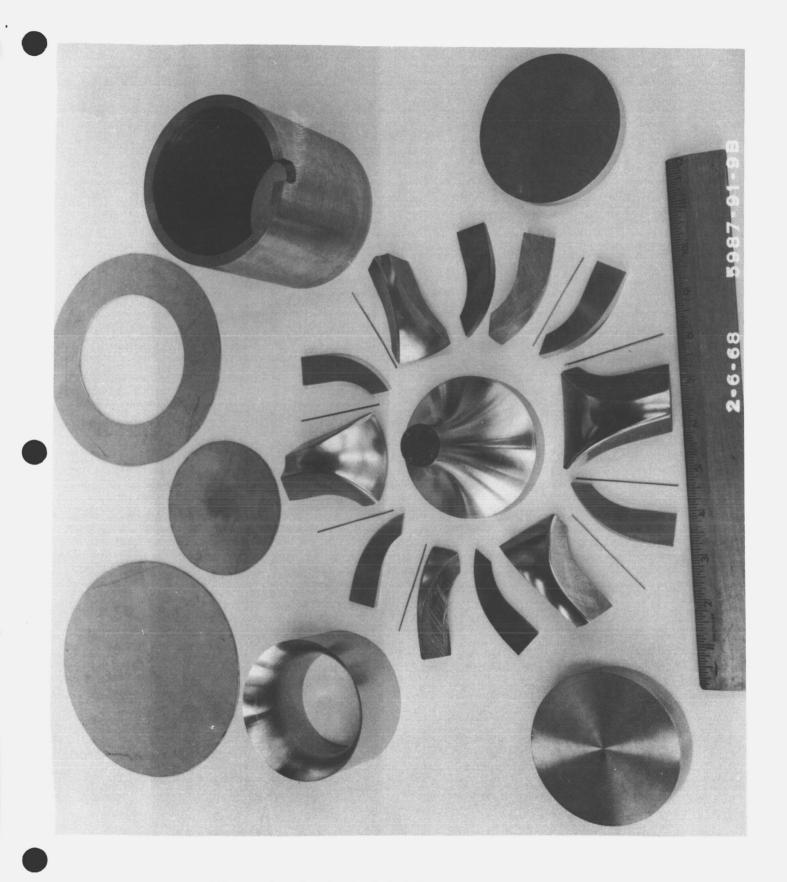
Final Simulated Impeller Sample Showing Complete Bond Assembly Before Lay Up
